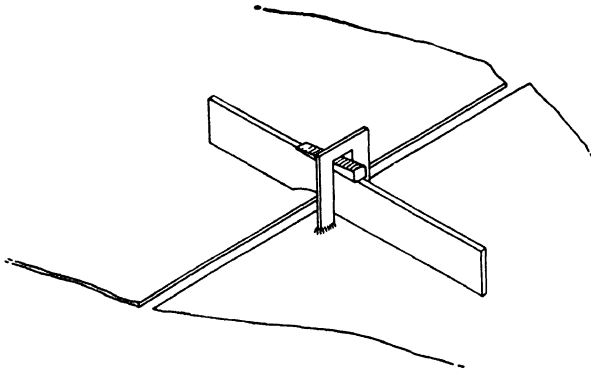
Strongbacks used for fairing butt welds.
